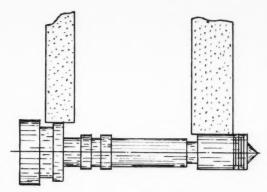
Drawing of two wheels of different widths for grinding two different diameters at the same time.
